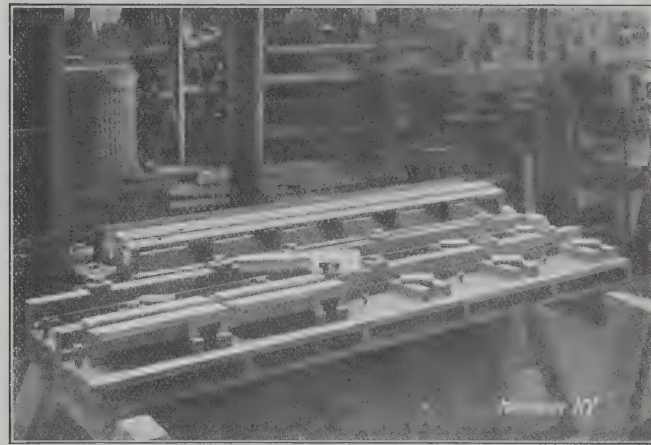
Fixture for Holding Lathe Carriage Slides while planing them
